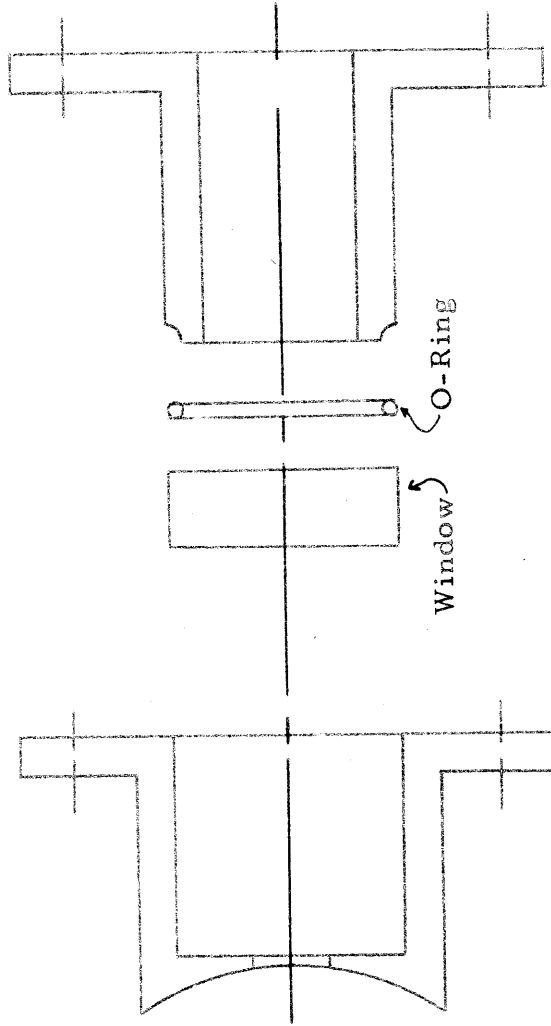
Cross-section of a removable mount for windows and heat gauges in the shock tube.
